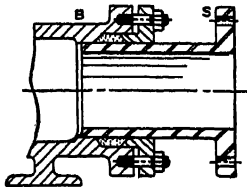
Fixed Slip Type Expansion Joint for Flared Pipe.
